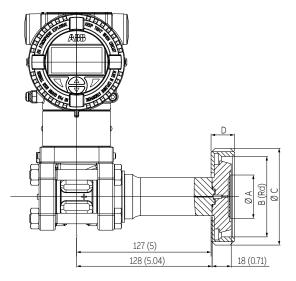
266DRH with barrel housing and direct mount seal S26TT off-line threaded flange
